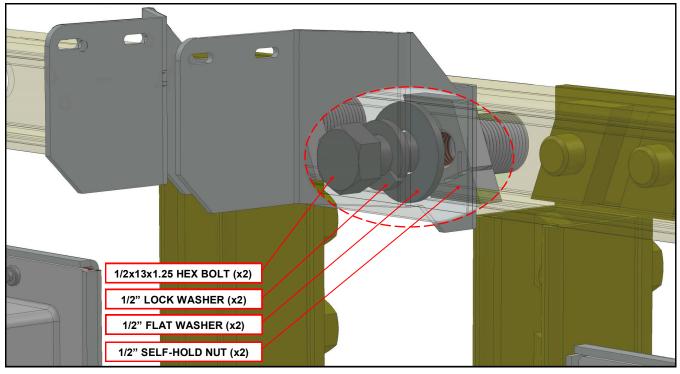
Mounting Switch Support to Frame, Ku-Band (typical)
